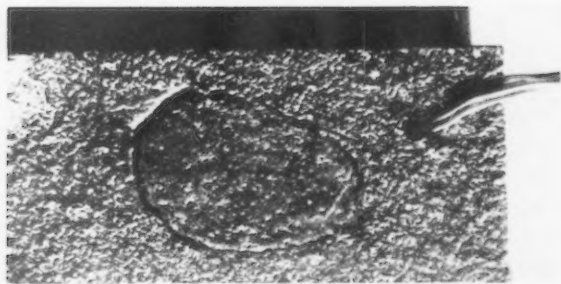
Core side of a casting showing failure of iron to lie firmly on the dry sand core, due to low dry permeability.
